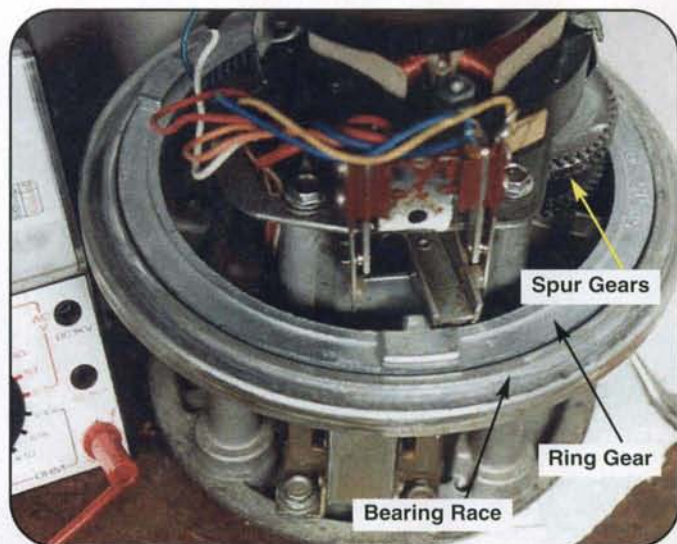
The spur gears, ring gear, and bearing race (see step 11).
